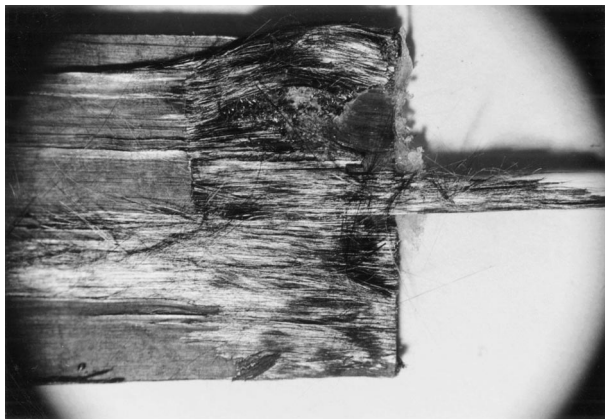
Fiber breakage, debonding, and pull-out in the tested specimen under welding pressure 0.35 MPa and time 2.2 s.
